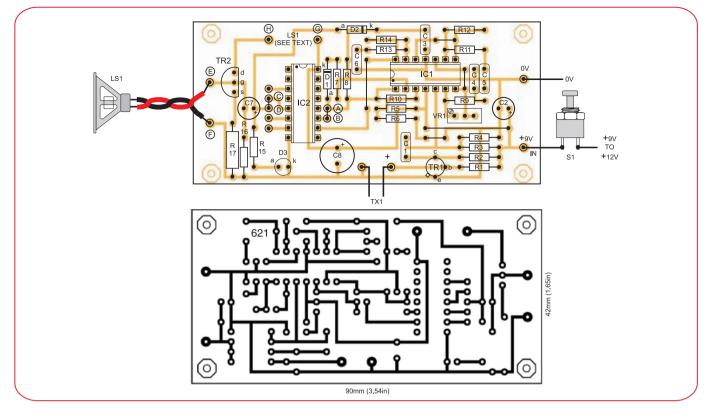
Bat Sonar printed circuit board component layout, wiring details and full-size underside copper foil master
